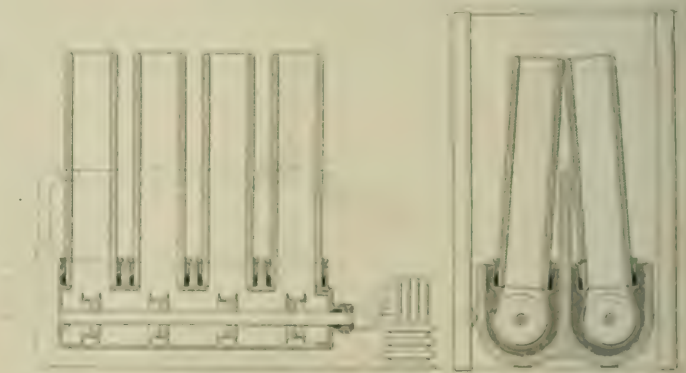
EXTRA HIGH-PRESSURE OIL-BREAK FUSE.
